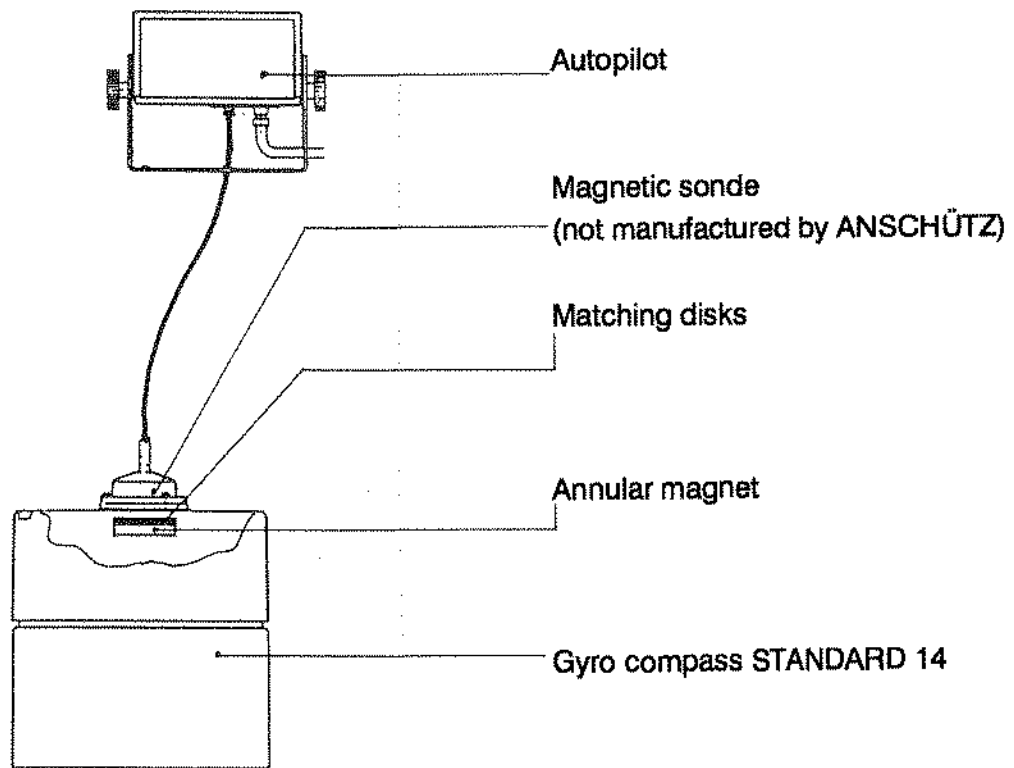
Assembly Drawing: STANDARD 14 / Magnetic Sonde
